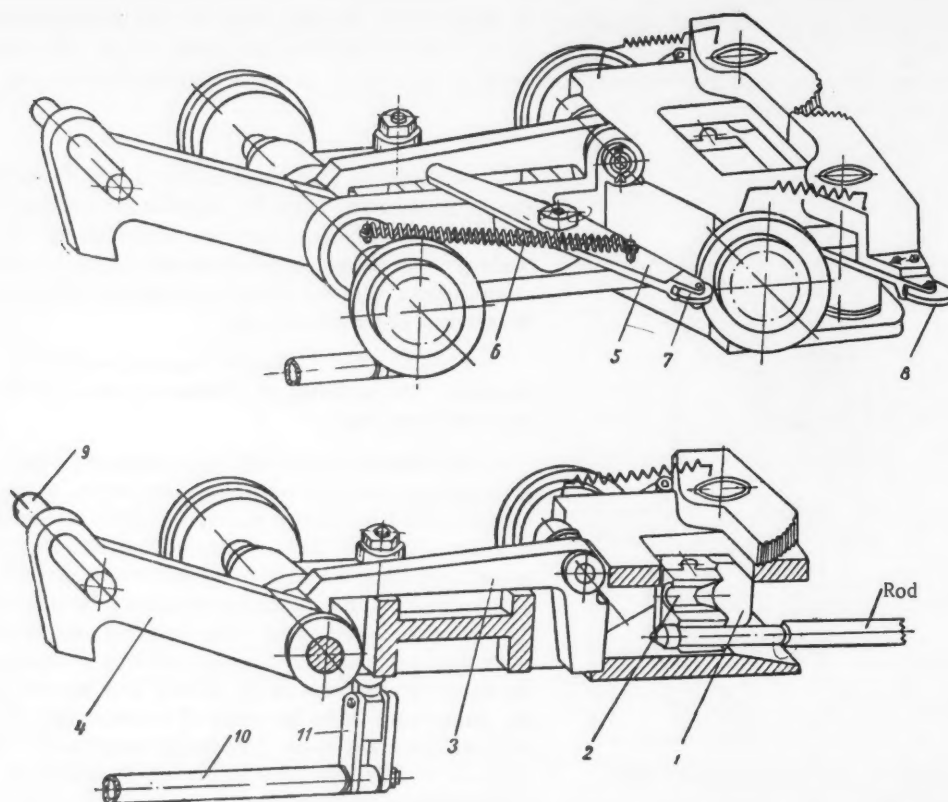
Automatic pincer. 1) Vise; 2) jaws; 3) catch; 4) drawing hook; 5) lever; 6) springs; 7) roller; 8) roller of toothed sector; 9) rod; 10) shaft; 11) hinge.
